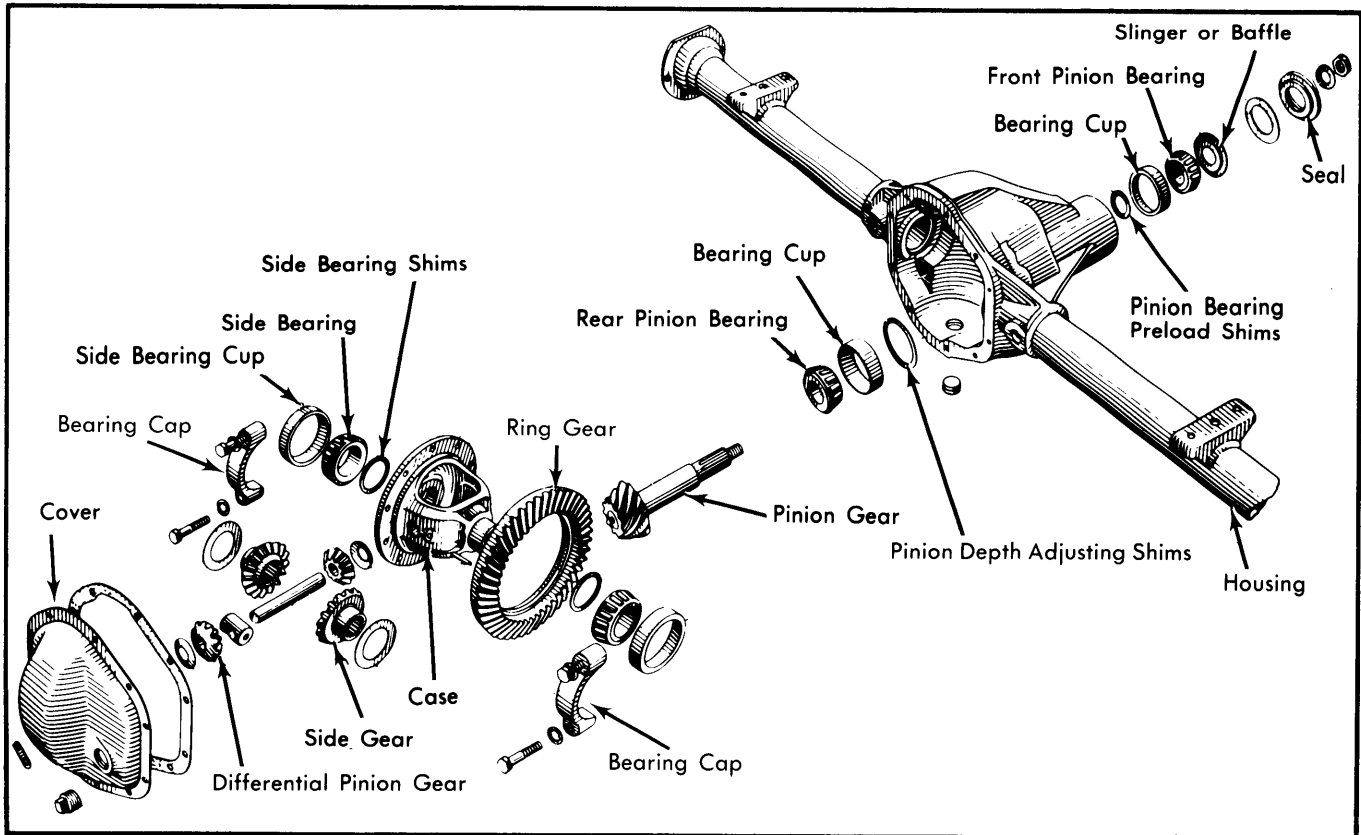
Exploded View of Spicer (Dana) Model 44 Semi-Floating Axle Assembly
